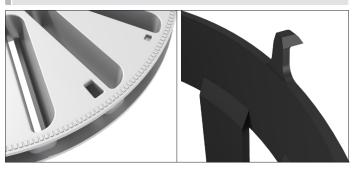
A: ALUMINUM DIFFUSER FACE ▼ INSTALLATION BOTTOM VIEW
